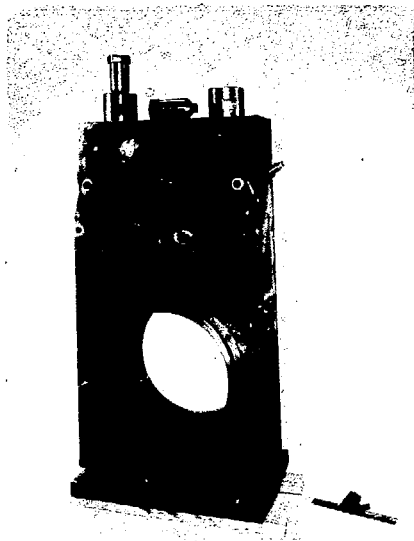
18-inch GATE-VALVE ASSEMBLED IN THE TWO-CYLINDER MODE. NOTE ONE GAS-GENERATOR LYING ON THE BODY, AND ONE MOUNTED IN THE LEFT CYLINDER.
